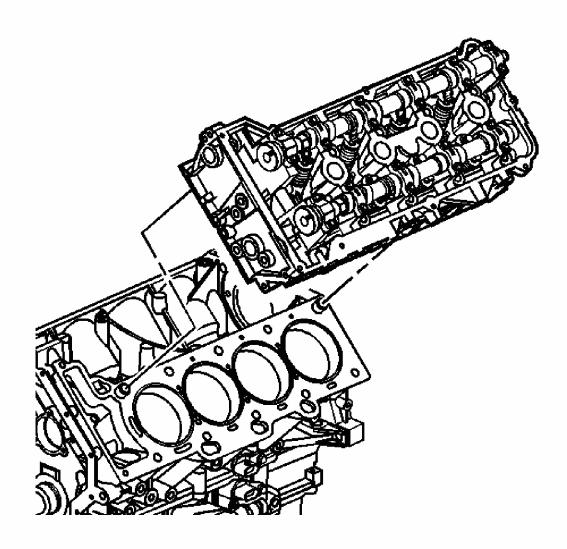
View Of Cylinder Head With Alignment Dowels - Left Courtesy of GENERAL MOTORS CORP.
